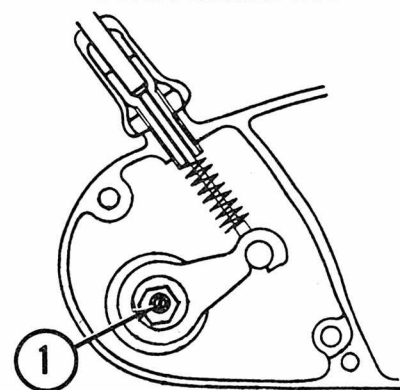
On manual clutch models, adjustment is accomplished by turning screw (1) after loosening the lock nut. Adjusting screw (1) is accessible through hole on right side cover after removing the rubber plug.
